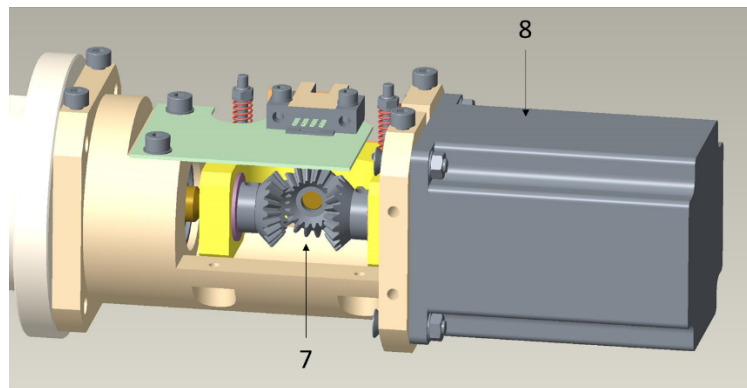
Valve drive for Hg Source with outer cover removed, parts labeled: 7. Driving cog wheels, 8. Stepper motor.
